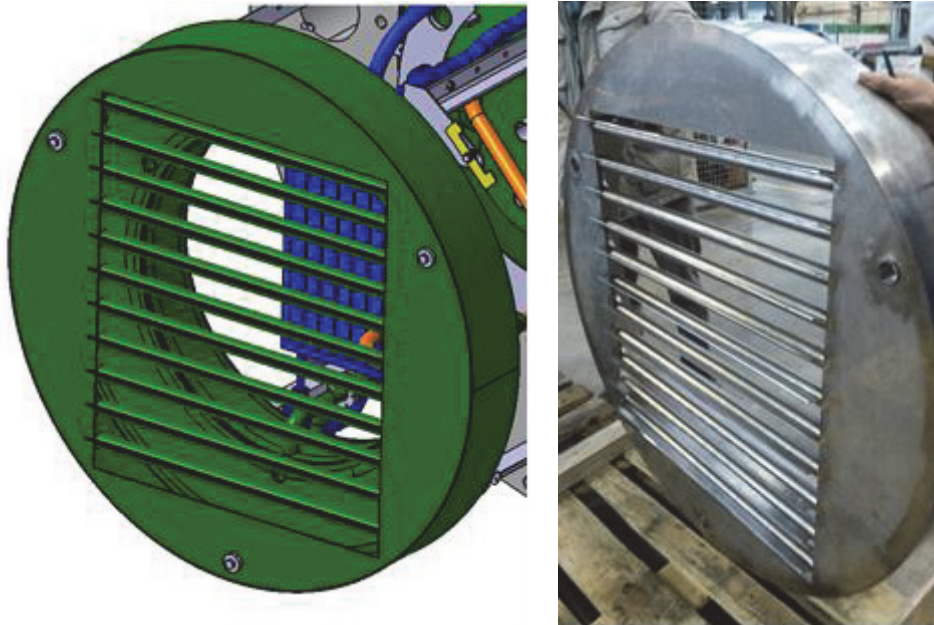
New inlet baffle system of the panel test set up concept (left side the design drawing / right side the manufactured front shield).
